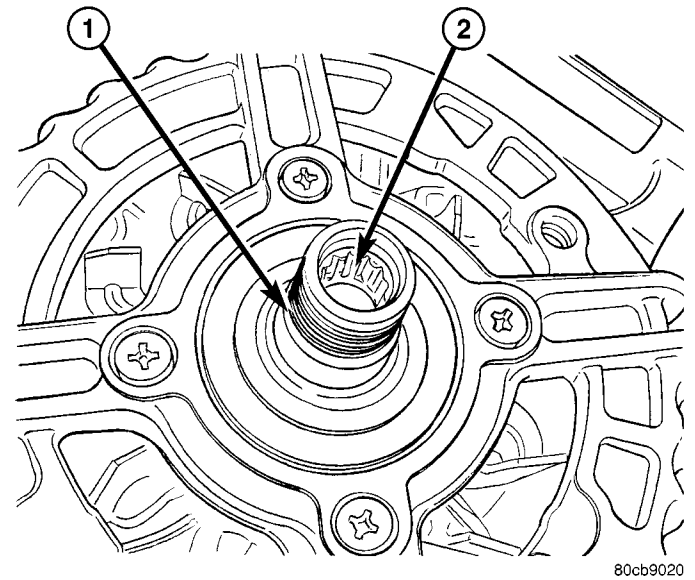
END OF GENERATOR SHAFT (SPLINED)
